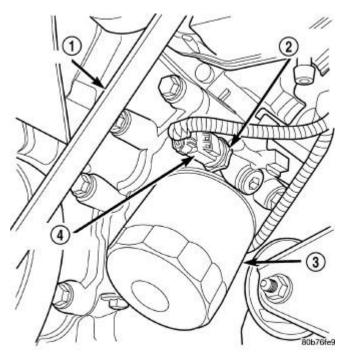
Identifying Engine Oil Pressure Sensor Courtesy of CHRYSLER LLC
